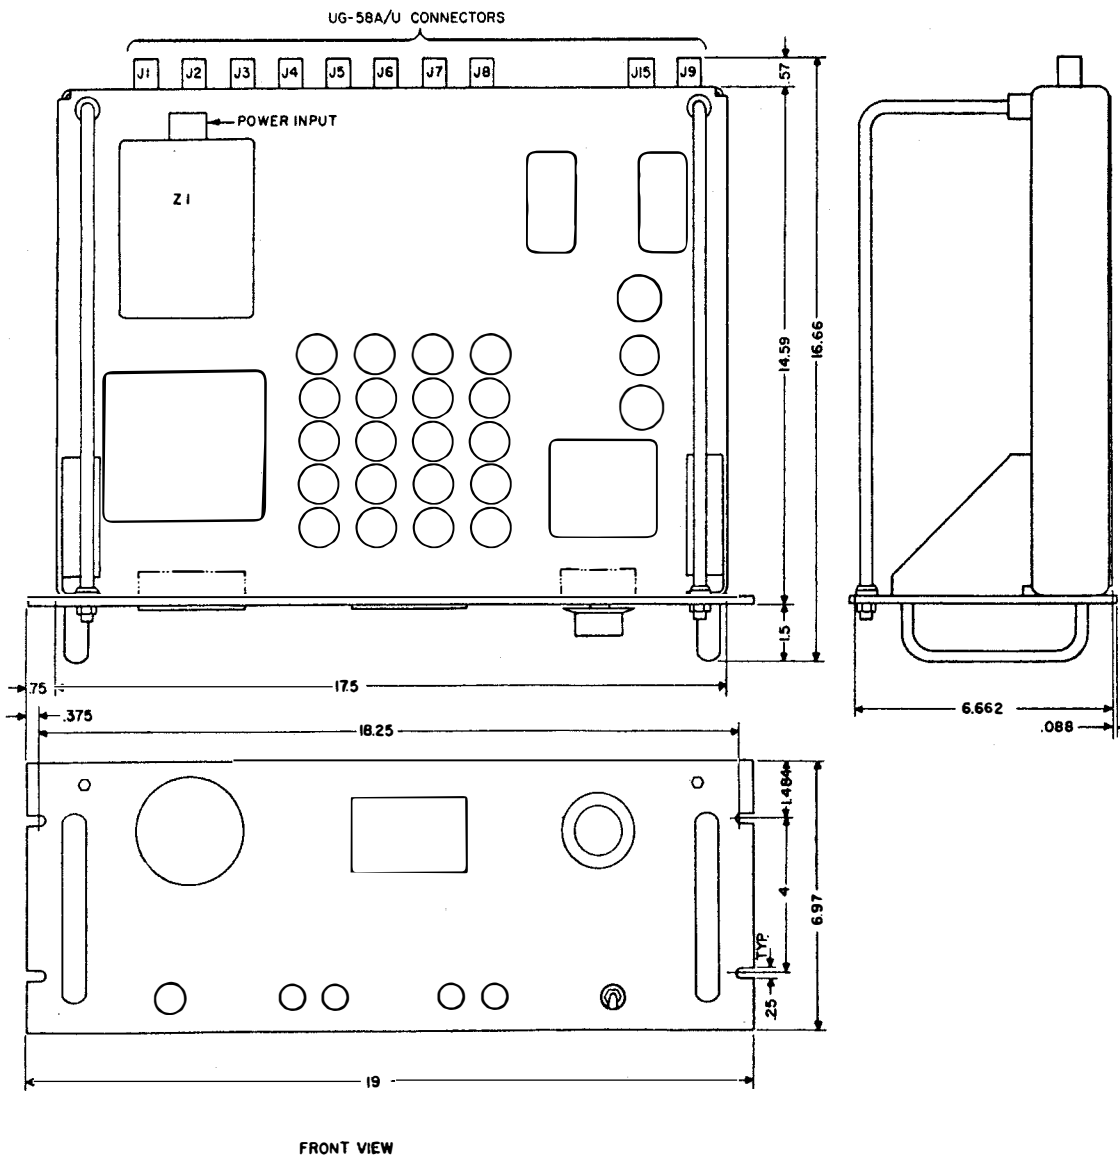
Antenna Coupler CU-874/U, Outline Drawing
